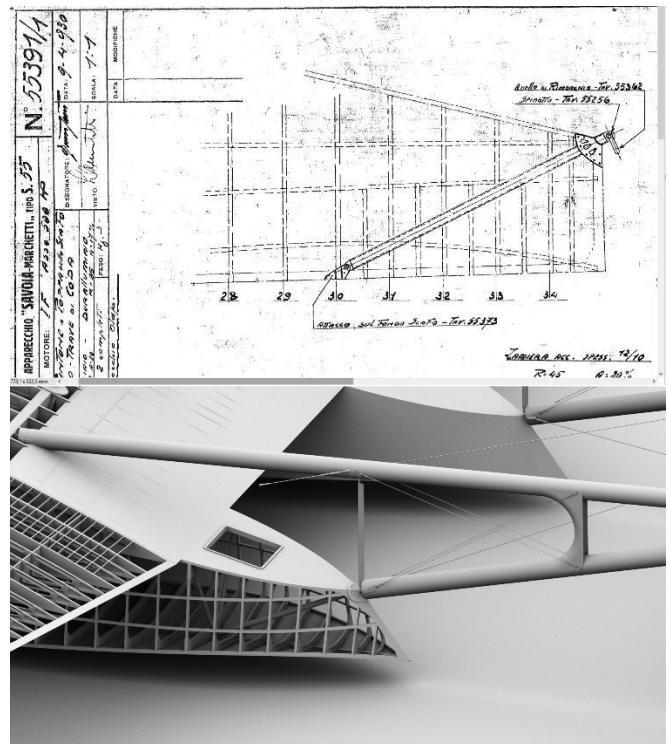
Hull-boom joint detail – original drawing & “Replica” CAD model
